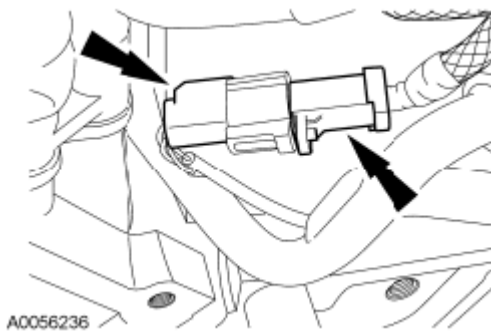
Locating Camshaft Position (CMP) Sensor Electrical Connector
